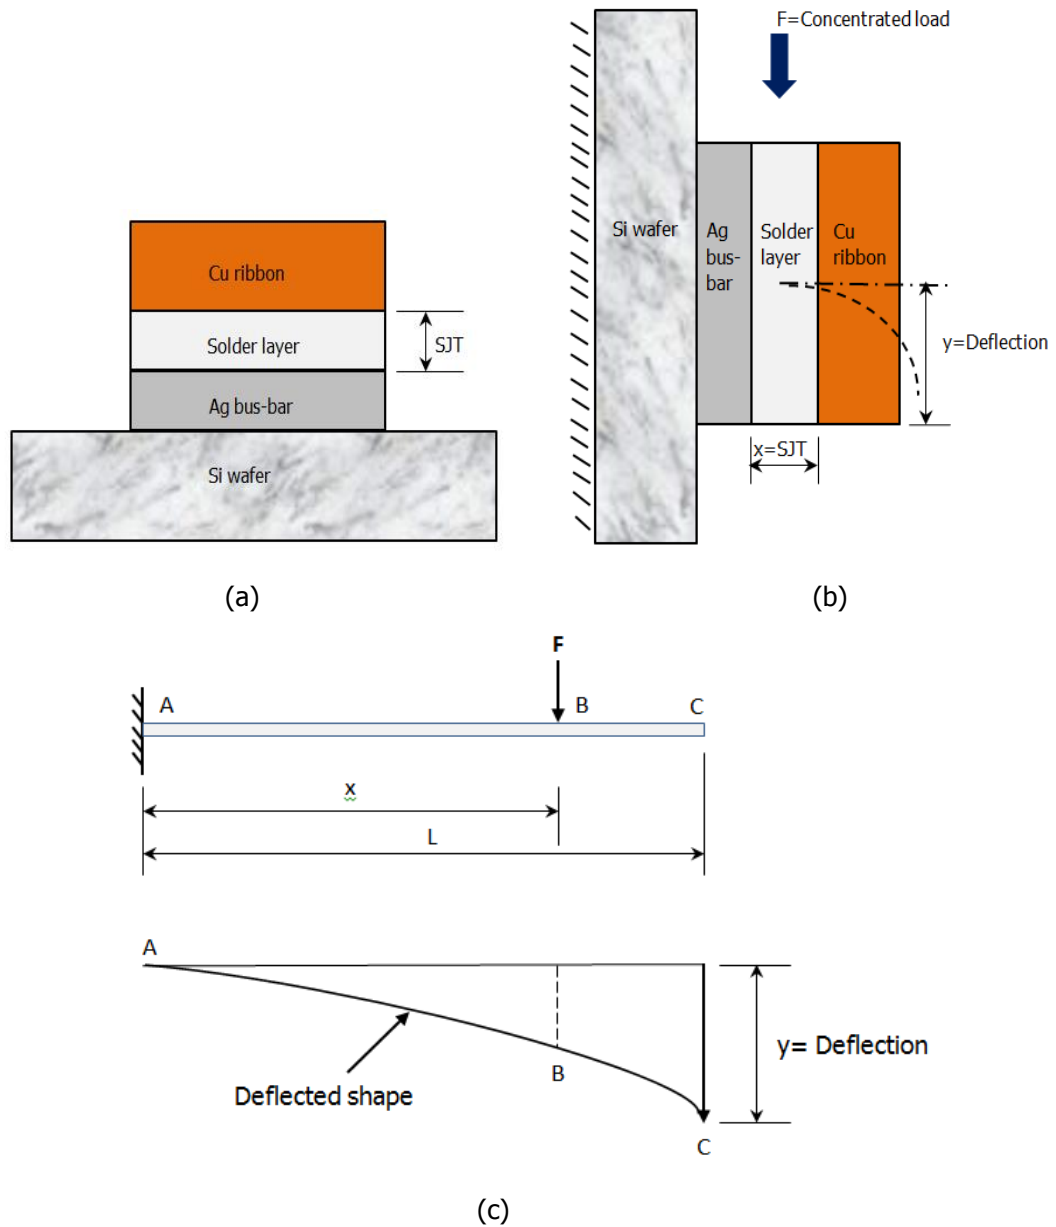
Schematic of solder joint in Si solar cell assembly showing:
